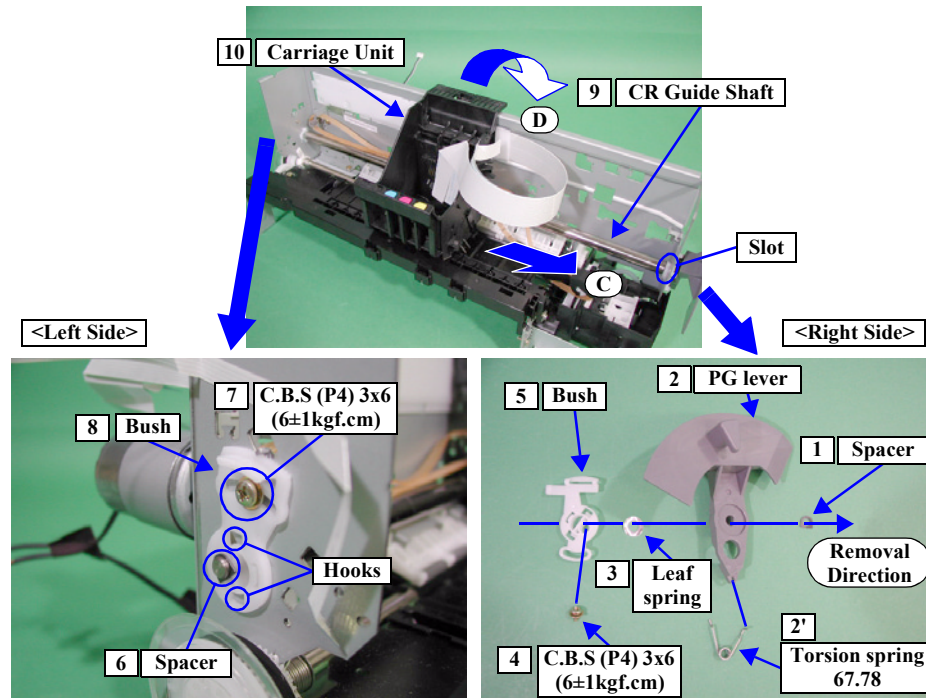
CR Guide Shaft/Carriage Unit Removal 2
